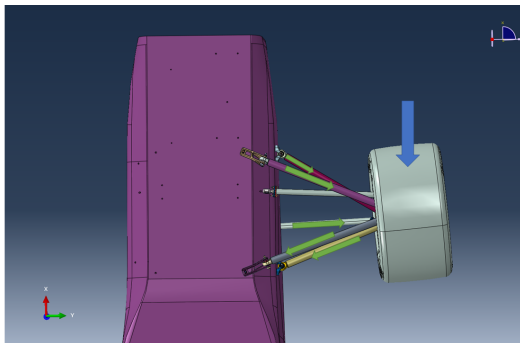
Force propagation in suspension when subject to pure longitudinal loading. Arrows not to scale.
